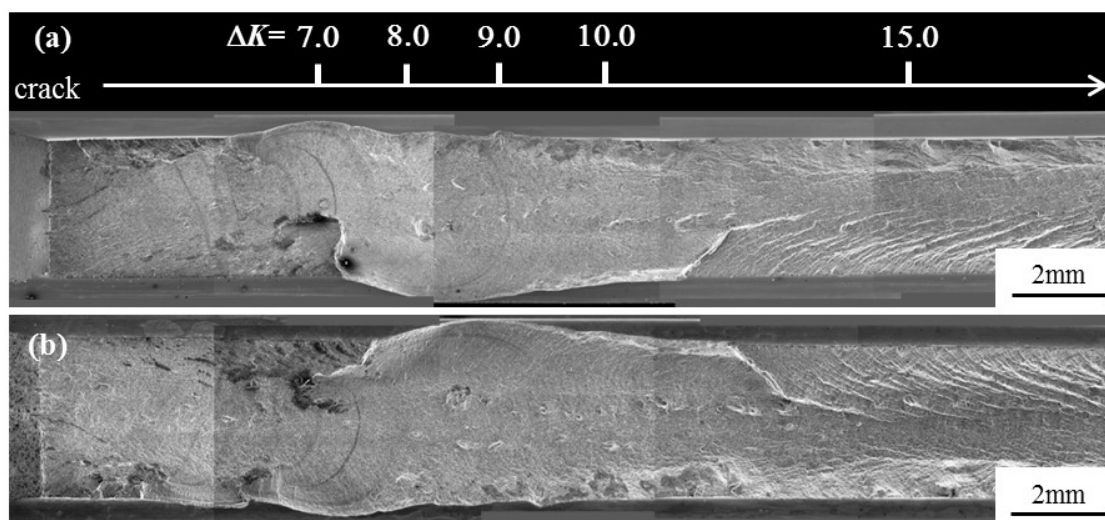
Fracture surface of PS<sub>2</sub>A after FCP test.
